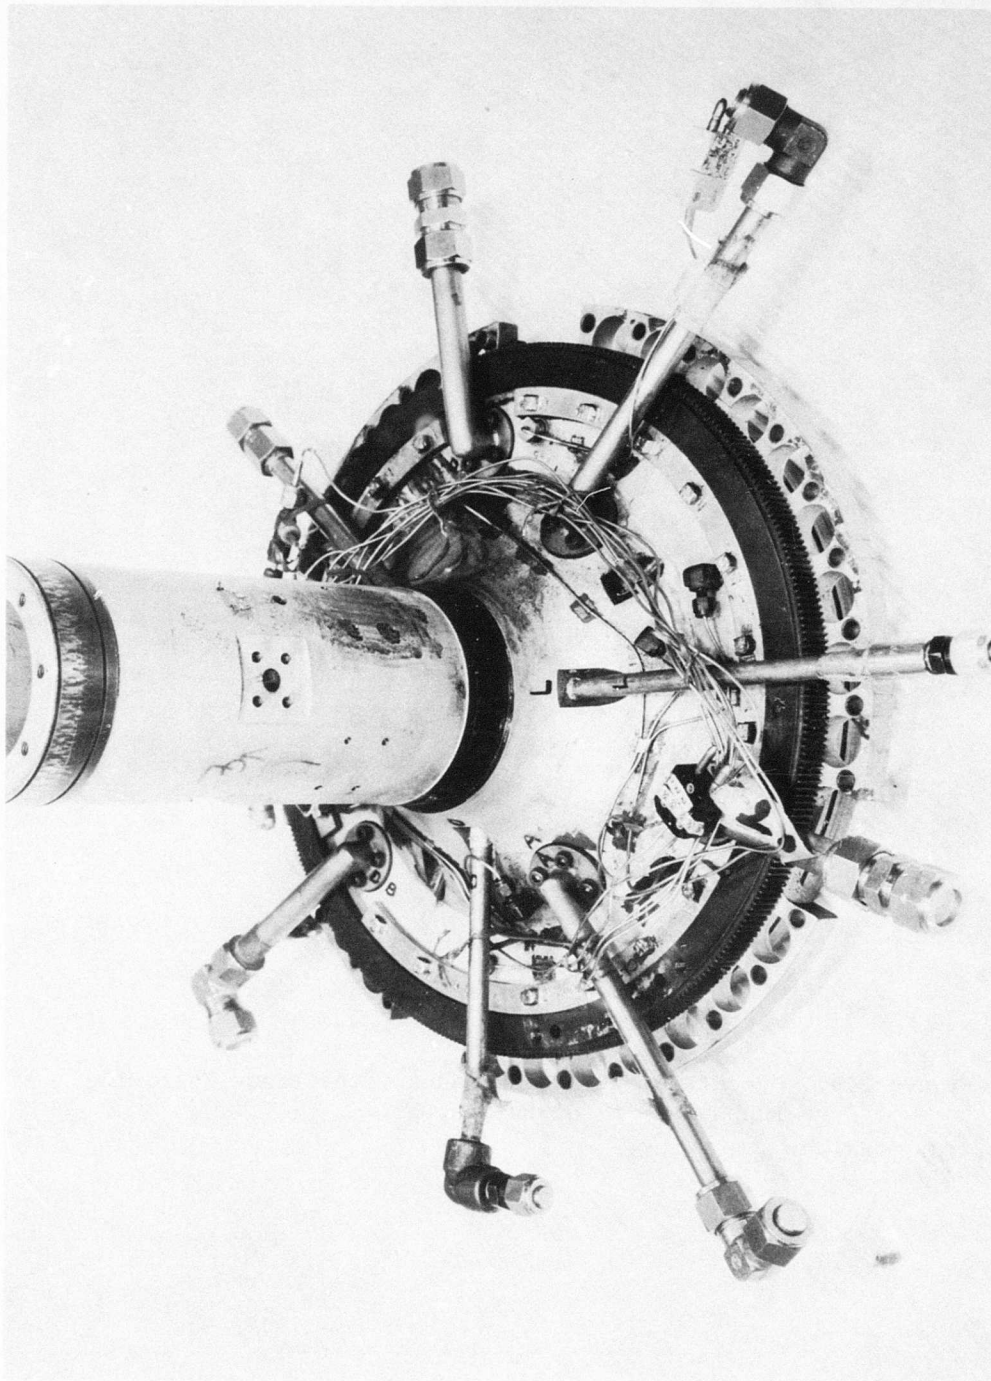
External View of Main Bearing Housing Following Phase II Investigation - Ring Gear in Position for Operating Supersonic Stators.
